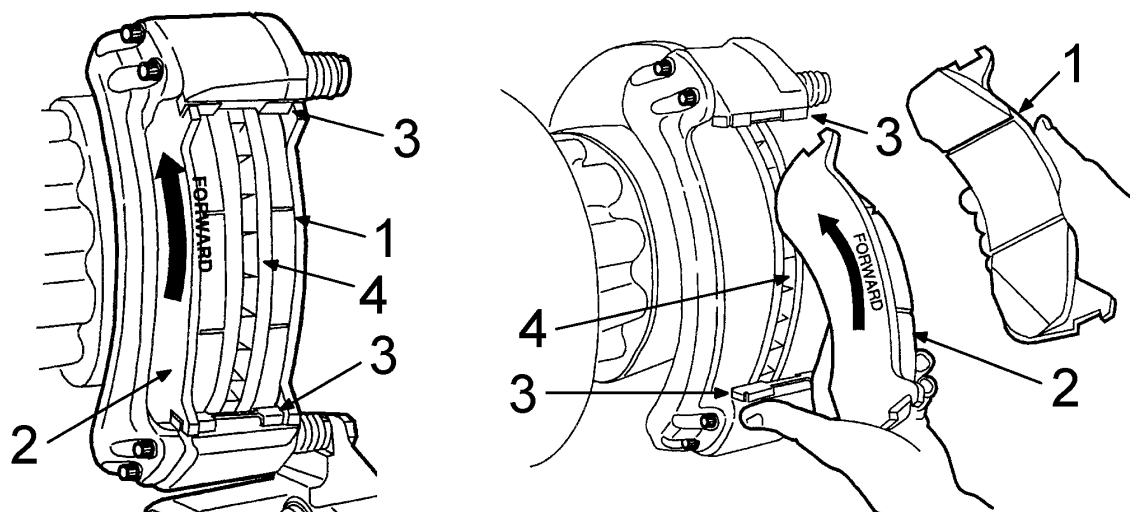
Inboard and Outboard Disc Brake Pads Marking of Arrow and Forward
